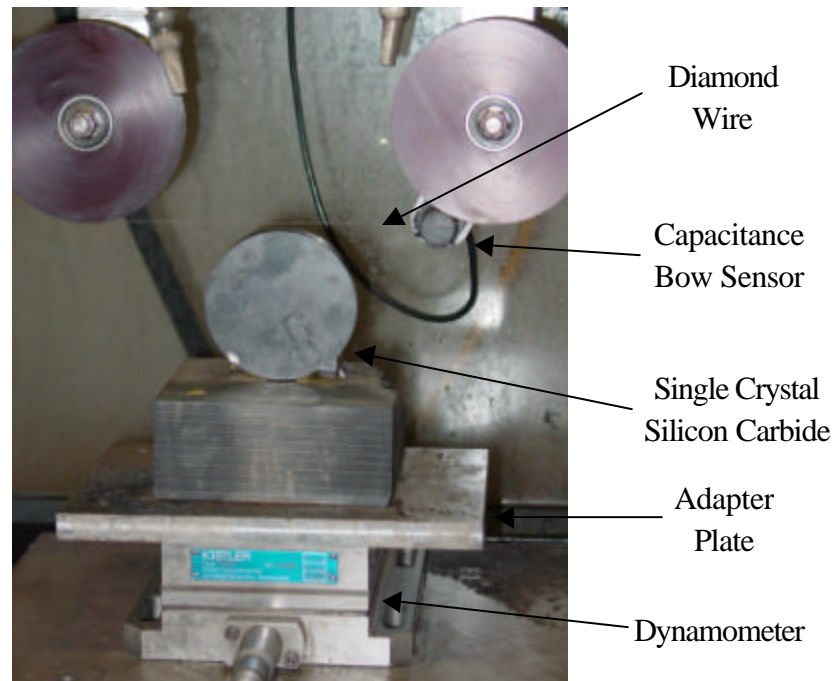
Single crystal SiC mounted inside of wire saw.
